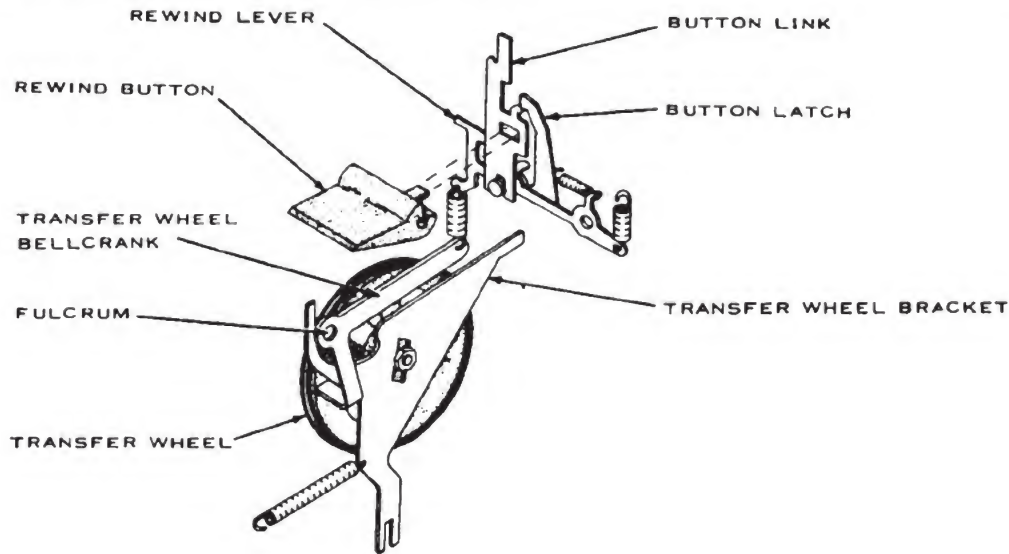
Rapid Rewind Actuating Mechanism.
